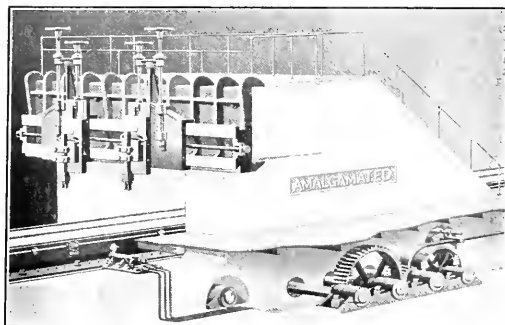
CONTROL PLATFORM FOR PLANING MACHINE
